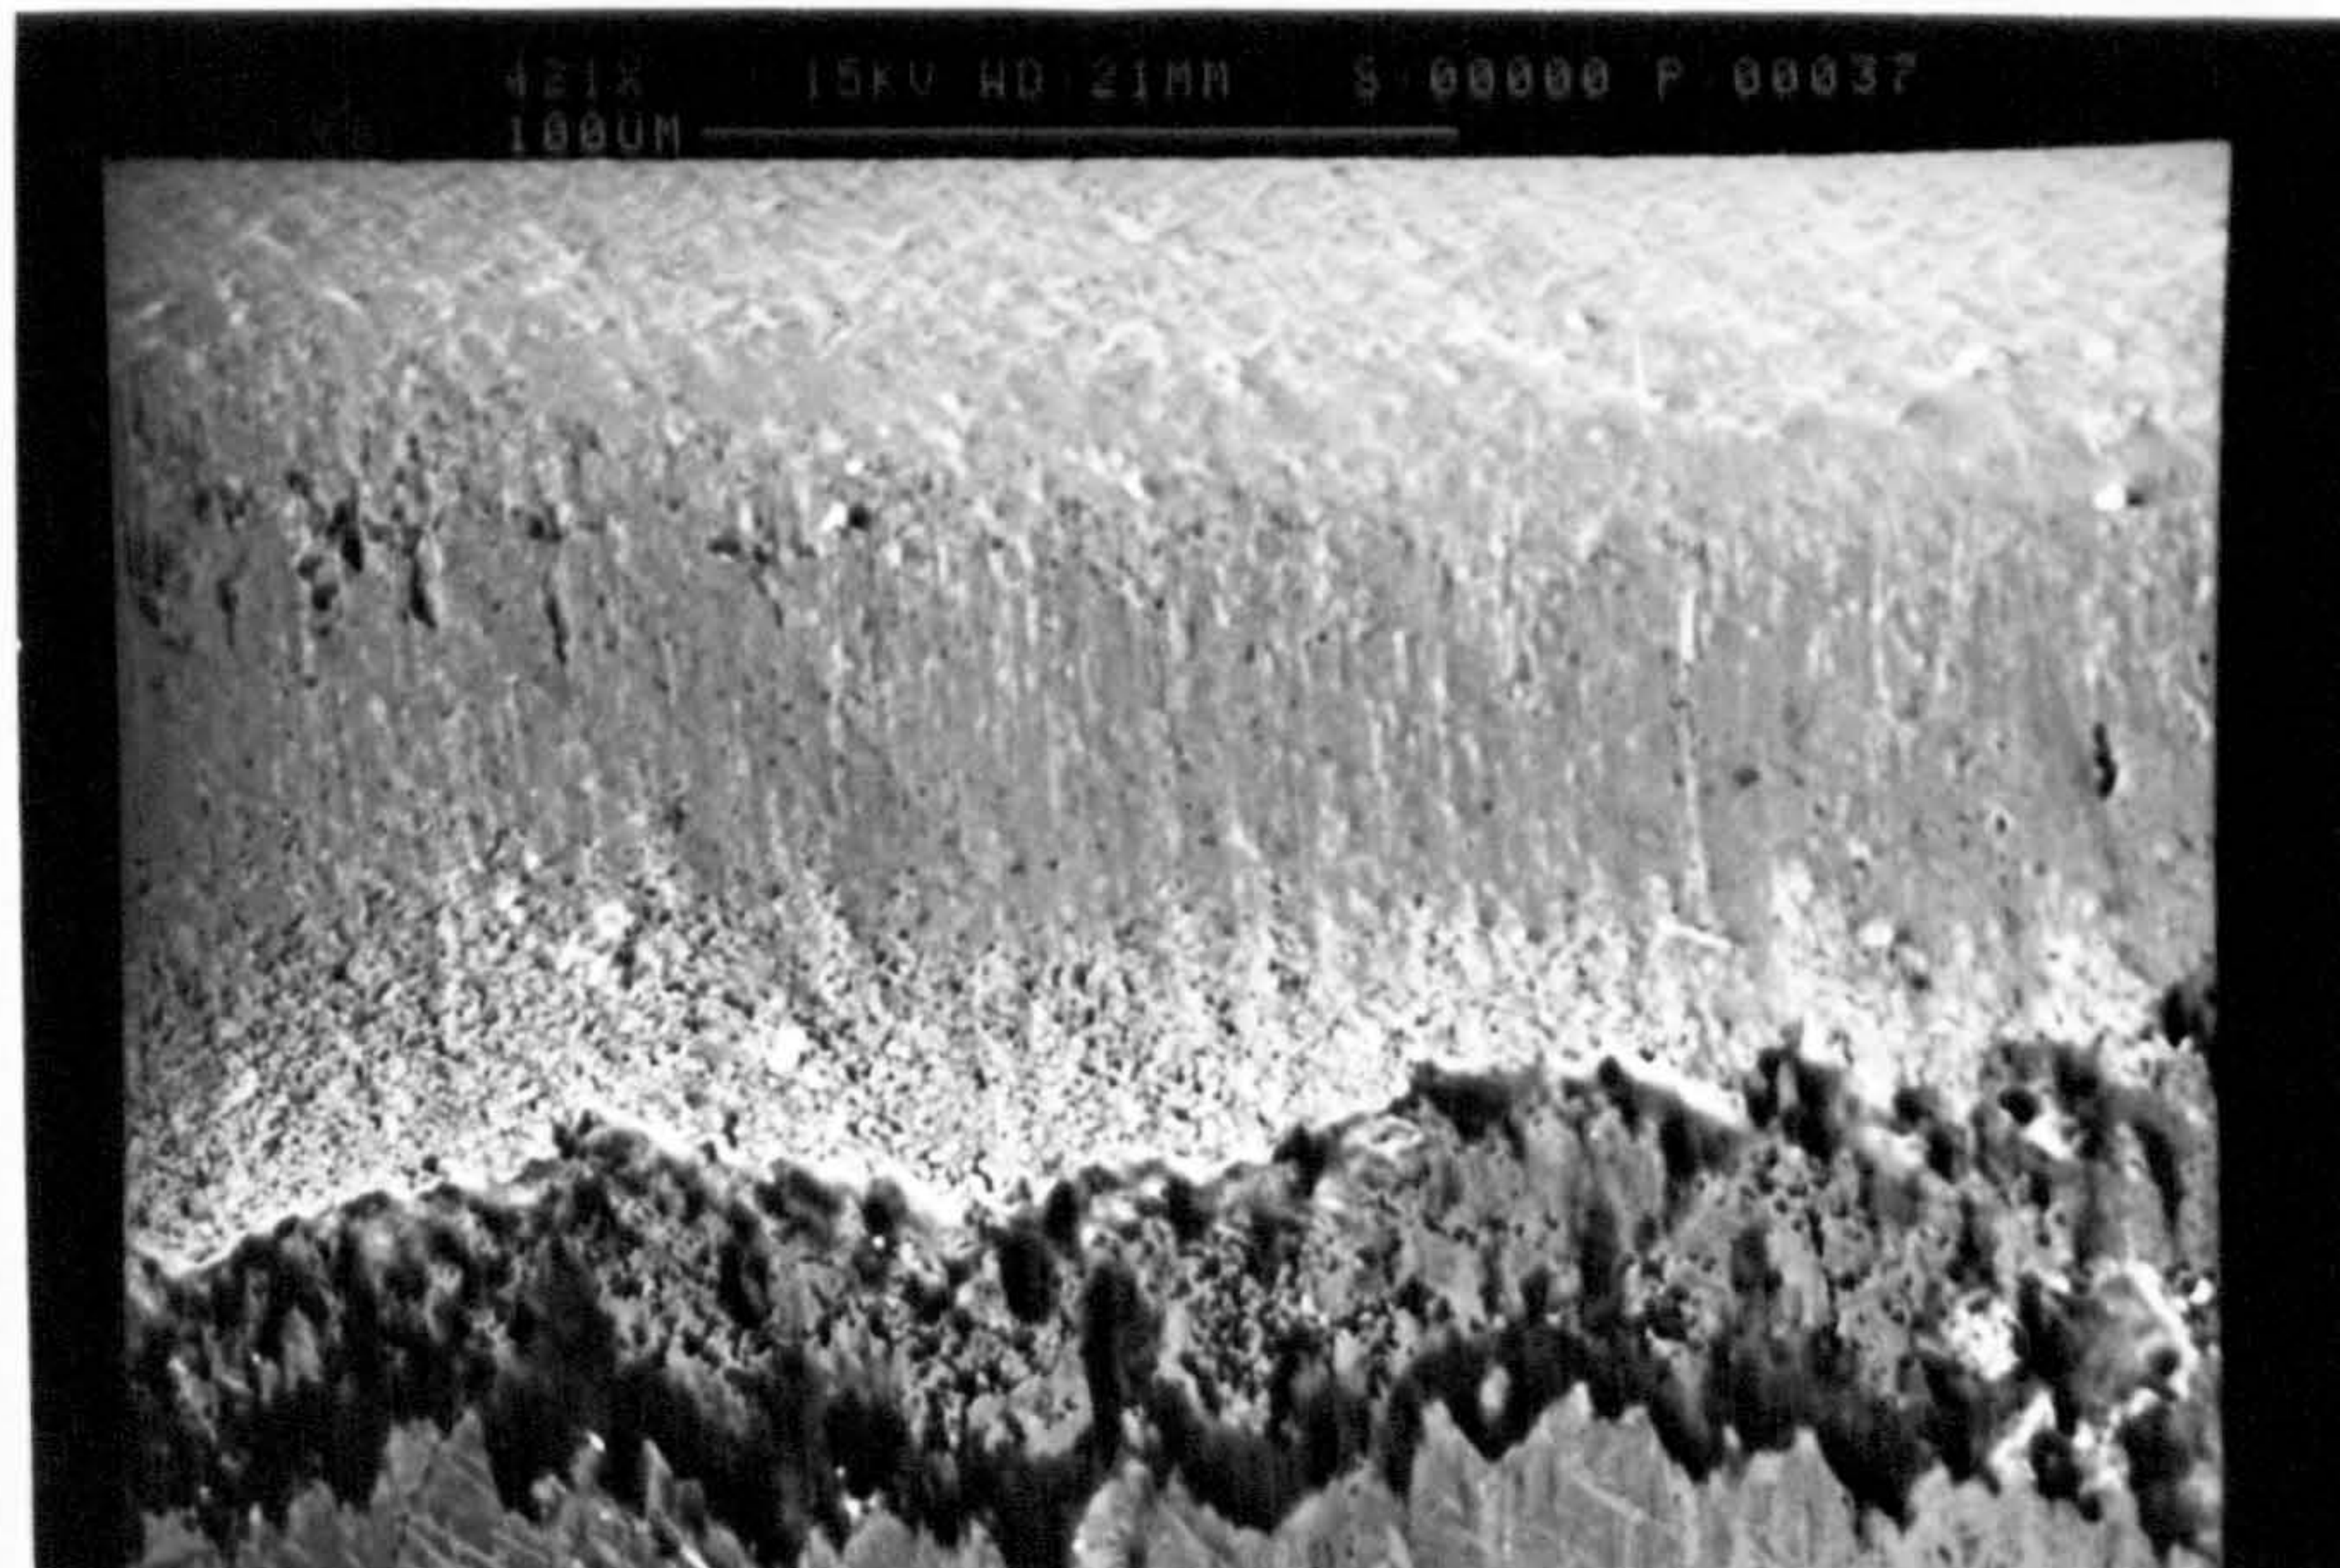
Flank wear land of a TiC coated carbide showing the non-uniform removal of the coating. (Speed = 300m/min, feed = 0.20 mm/rev, cutting time = 5 min)
